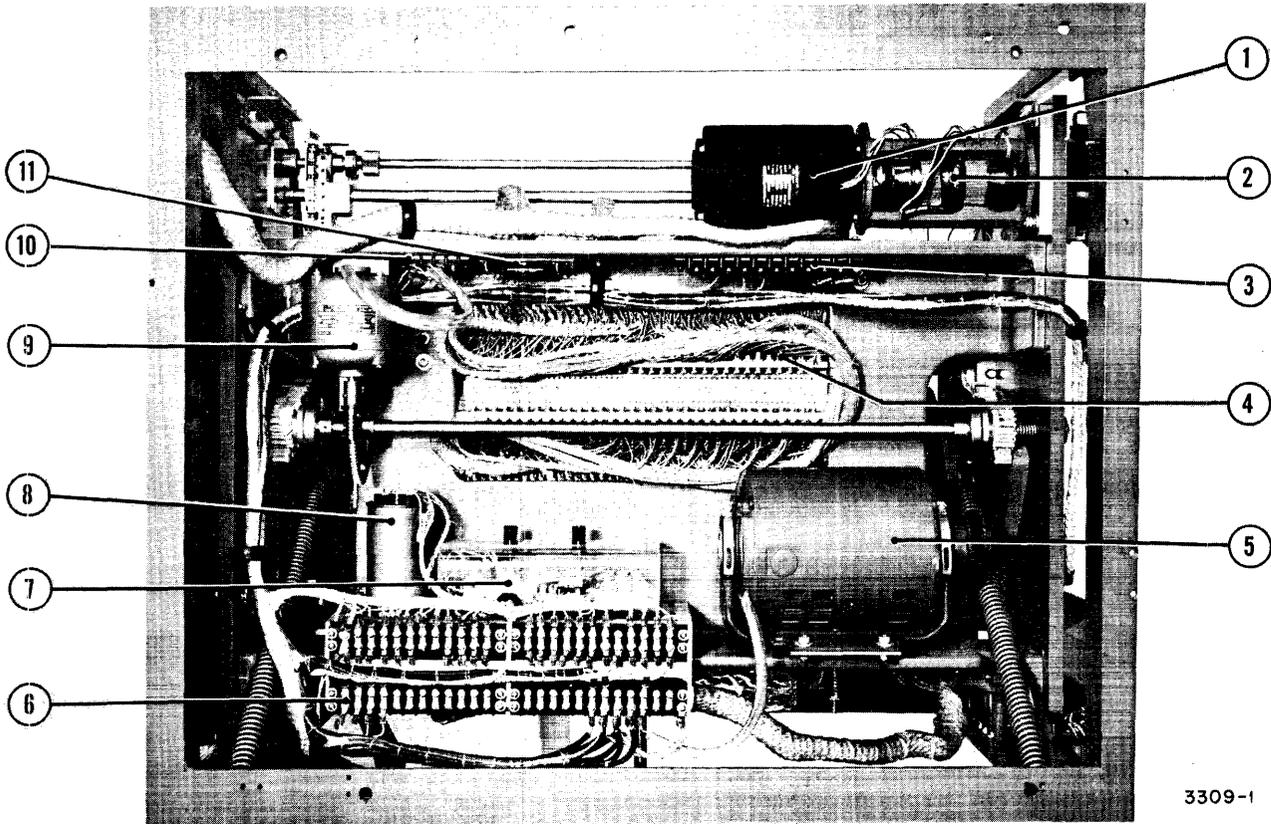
Ribbon-Feed and Print Mechanism, Front View
